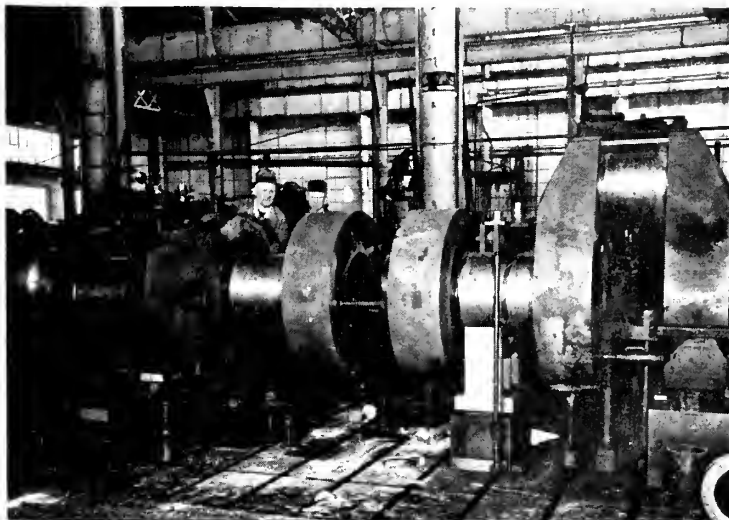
, below, top: 1" oil hole being drilled diagonally from crankshaft to journal bearing. The angle necessitated the use of a drill 5 feet long. This operation is being performed on a #340 Giddings and Lewis horizontal.
